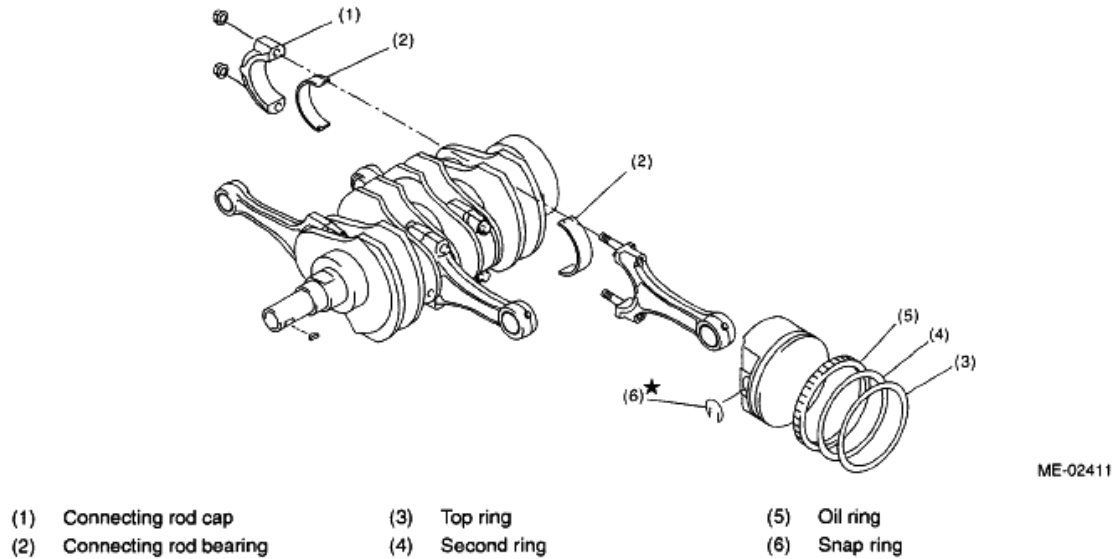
Identifying Connecting Rod Cap, Top Ring, Oil Ring, Snap Ring And Connecting Rod Bearing
